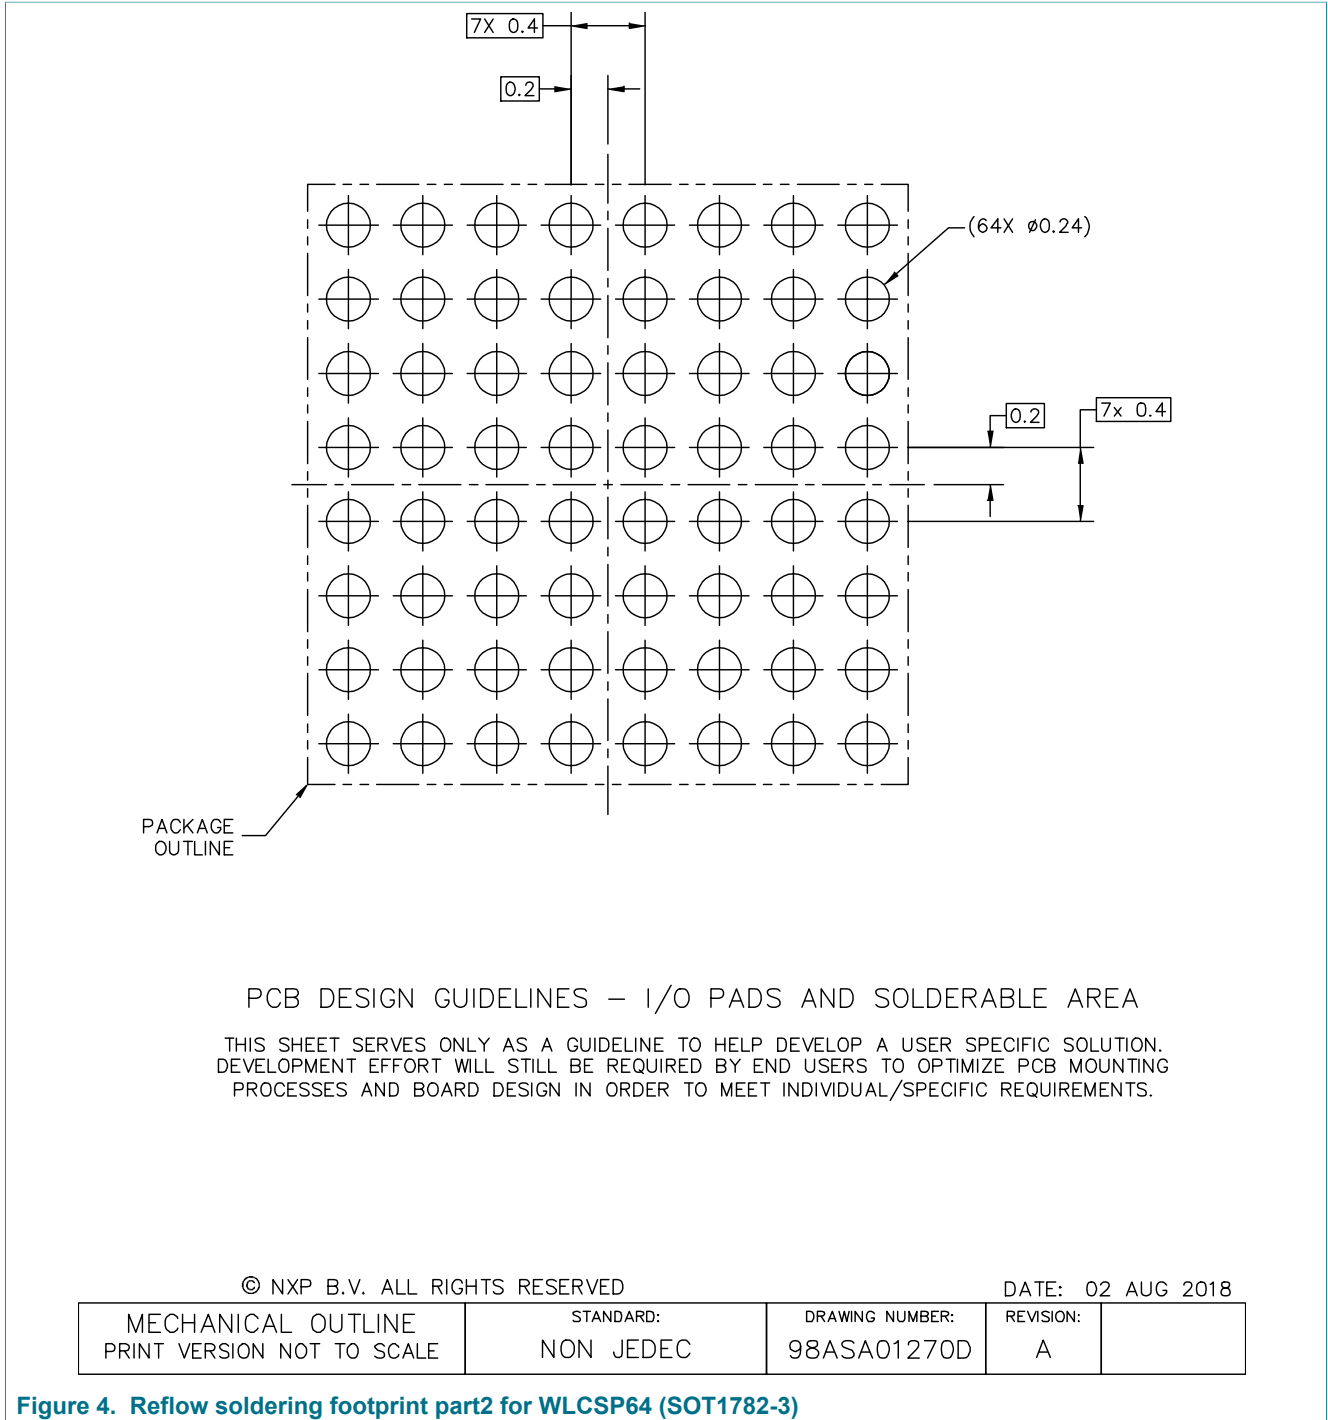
Reflow soldering footprint part2 for WLCSP64 (SOT1782-3)
